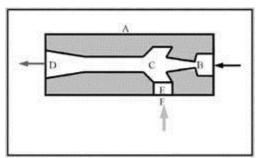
Cross-sectional view of venturi vacuum generator
